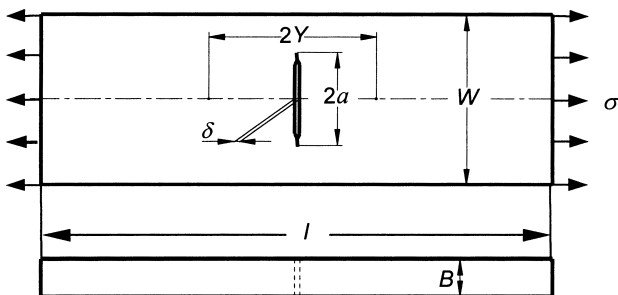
WP specimen for the experimental determination of fracture toughness on butt-welded joints ¹
